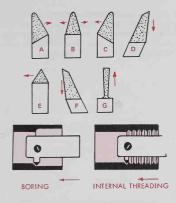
Common lathe cutting tools. (A) Left-hand turning tool; (B) Round-nose turning tool; (C) Right-hand turning tool; (D) Left-hand facing tool; (E) Threading tool; (F) Right-hand facing tool; (G) Parting or cut-off tool.
